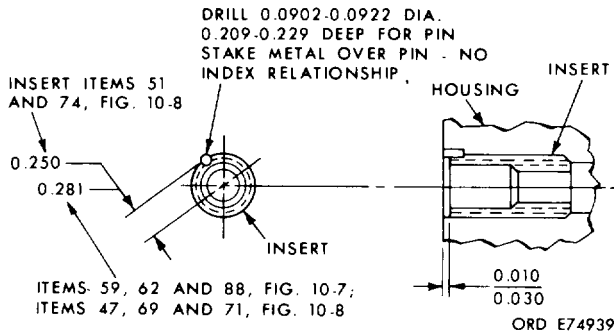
Dimensions for installing screw thread inserts and insert staking pins.
